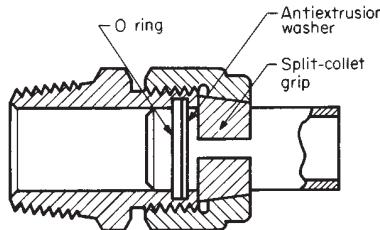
O-ring seal joint. (Courtesy of the Lenz Co.)
